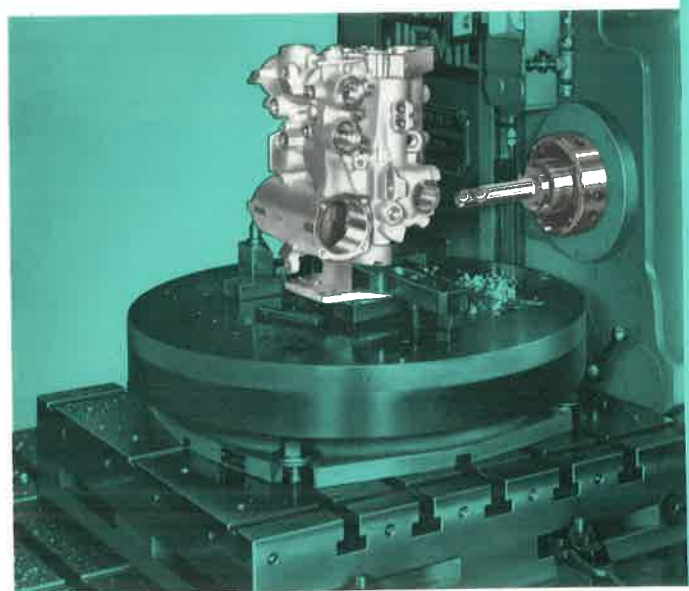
, above. Boring, milling, drilling and tapping fuel control body for jet engine.
